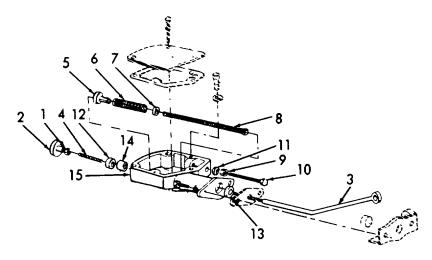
Governor Sub-cap, Disassembly/Reassembly.
